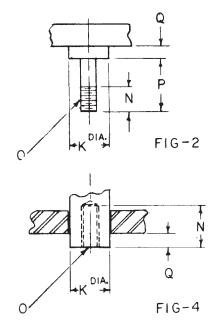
# DETAIL FOR SOLENOID MOUNTING BASES AND PLUNGER END CONNECTION
